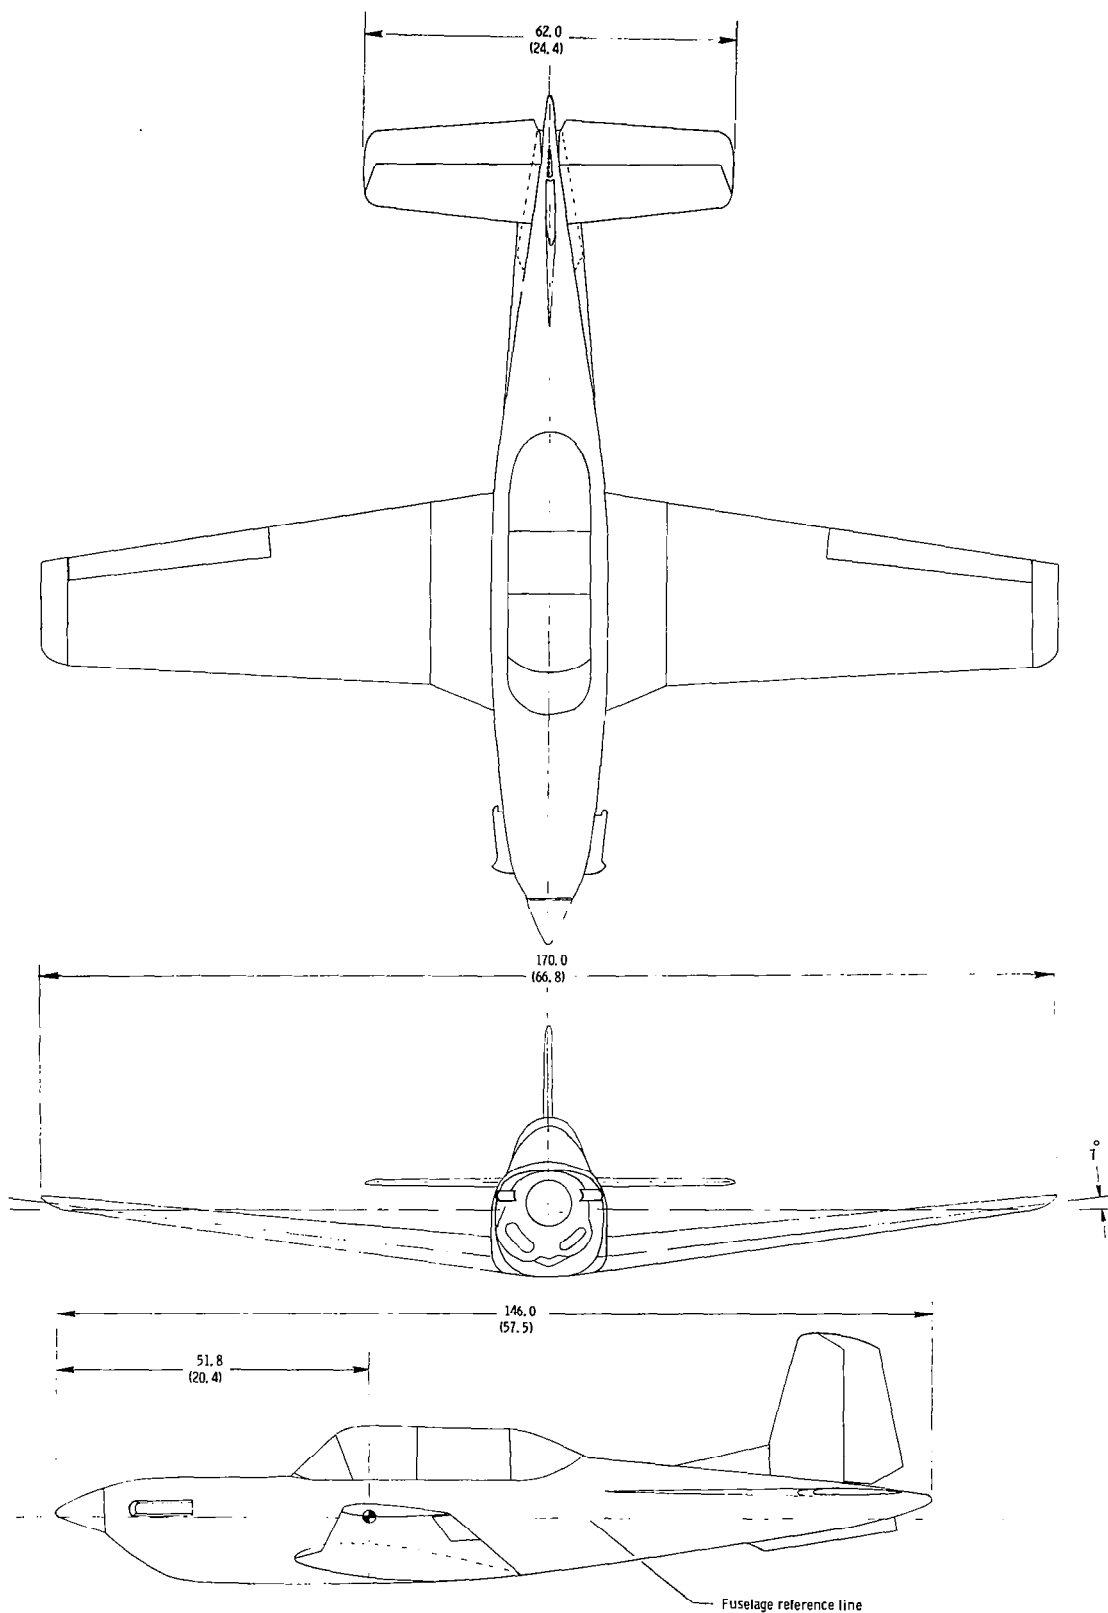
Three-view drawing of basic 1/6-scale low-wing trainer. Center-of-gravity positioned at 0.25C. Dimensions are given in centimeters (inches), model scale.
